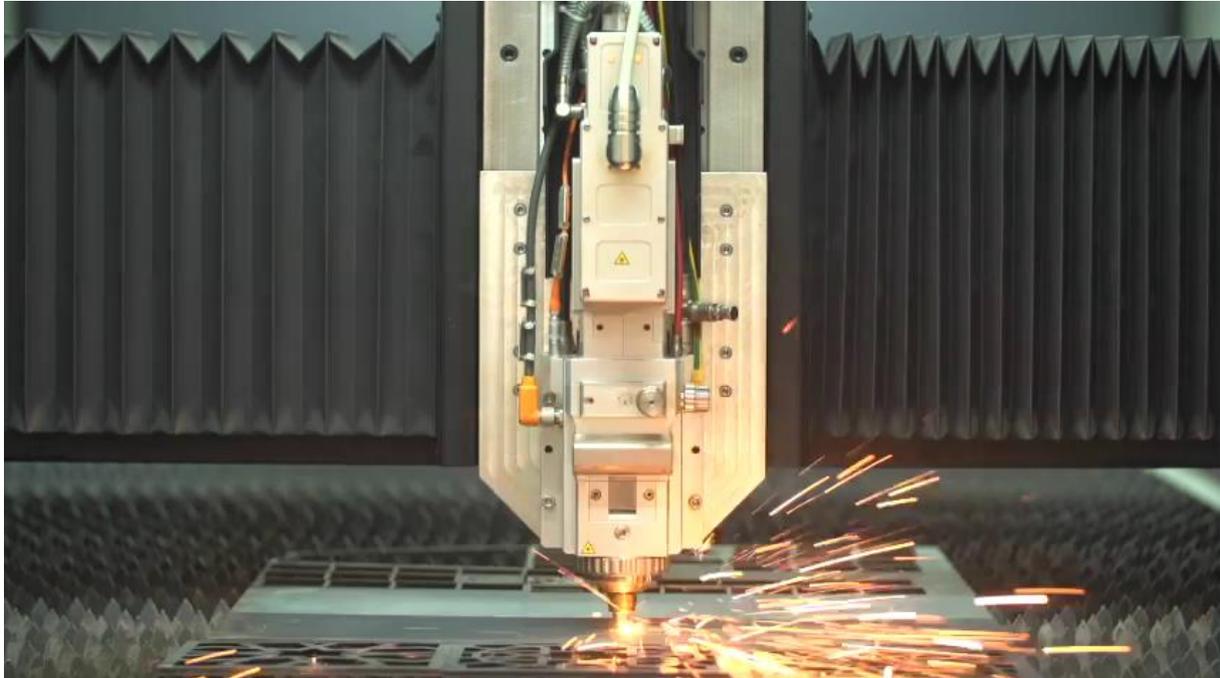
PESADA CNC laser cutting machine and shuttle table (image: Accumech)
